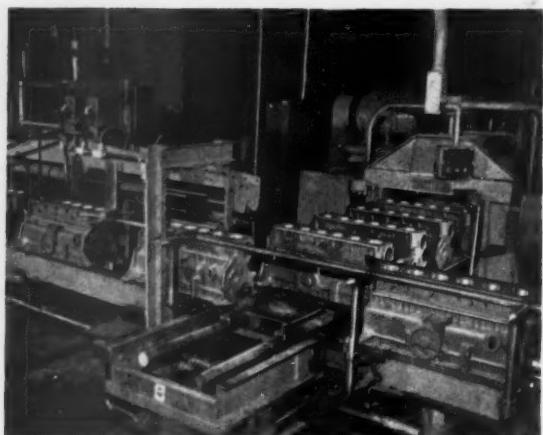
Overhead transfer bar and broadside shuttle for feeding a milling machine
